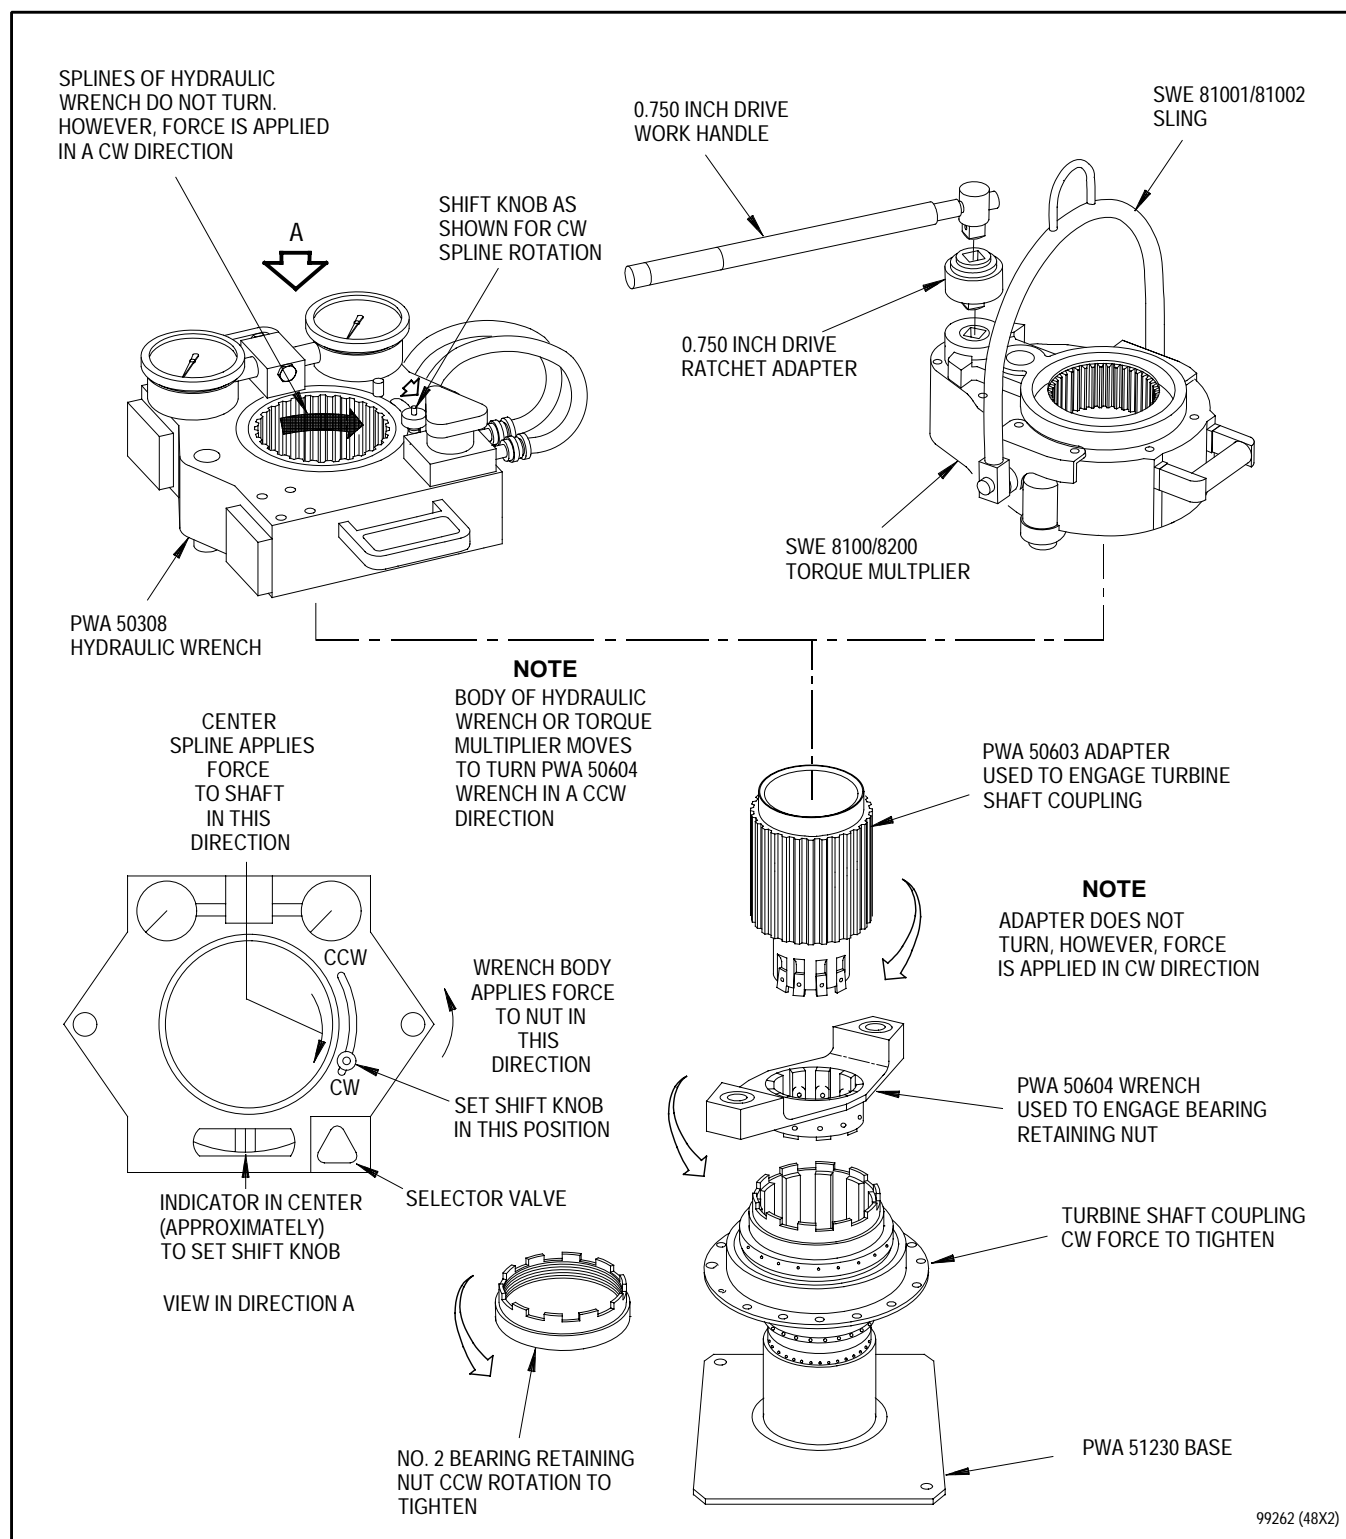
No. 2 Bearing Retaining Nut - Installation Tooling
